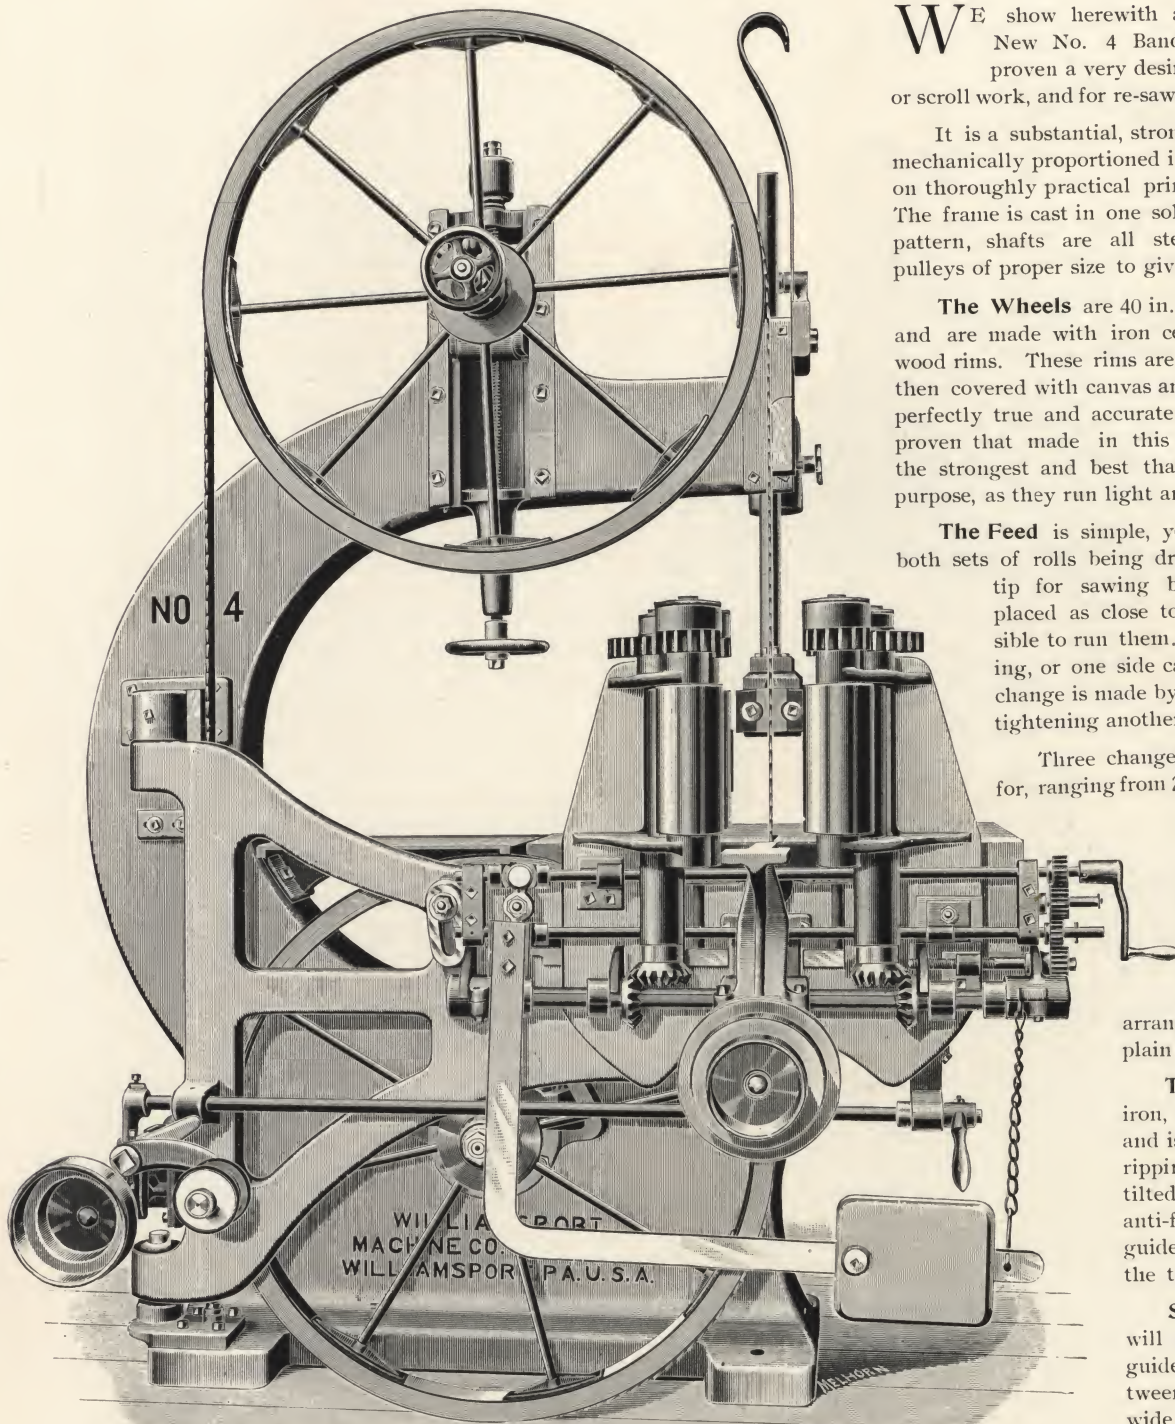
Complete, 42-inch Scroll and Re-Sawing Machine.....	Required H. P. 2 to 5	Weight. 2,900 lbs.	Code Word. Fable.
